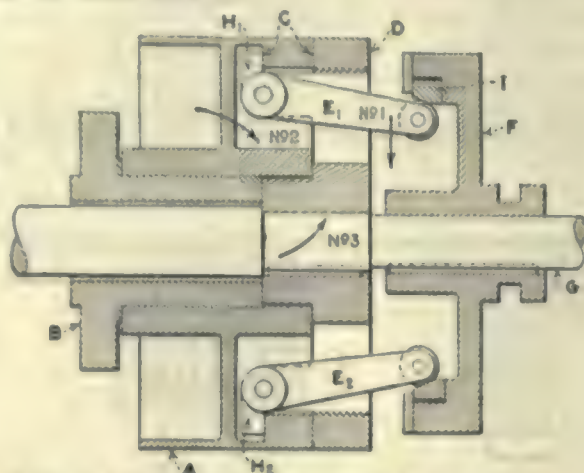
SINGLE PLATE CLUTCH ASSEMBLY
